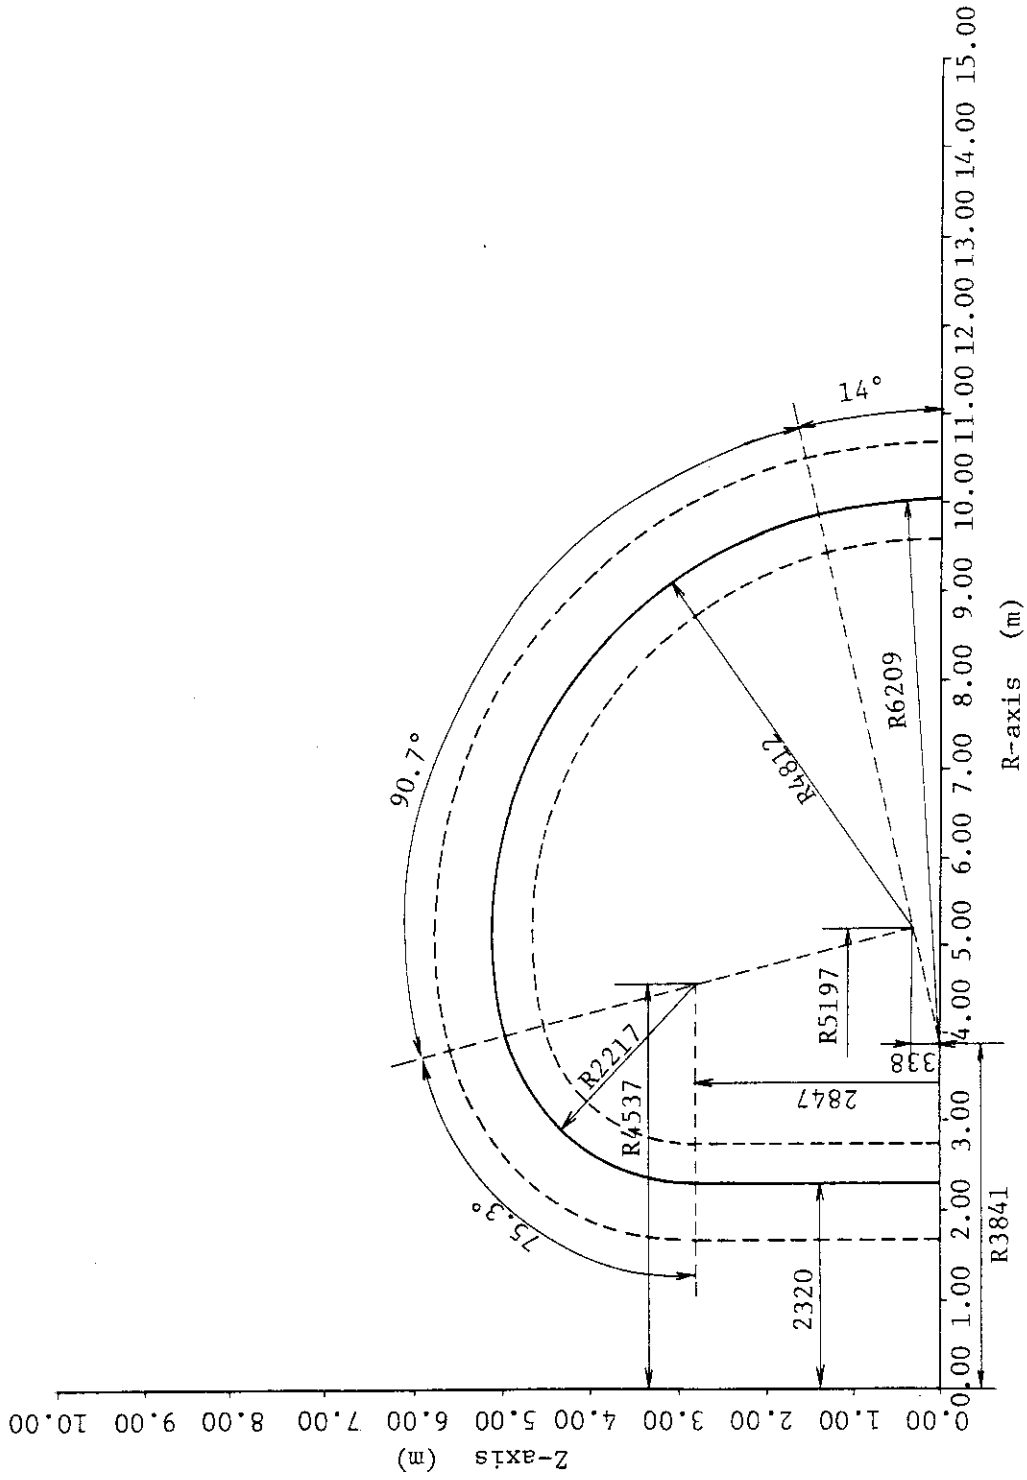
TF coil dimension for full-breeding blanket concept
